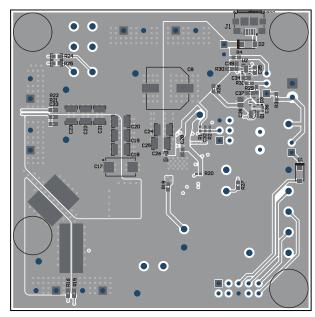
TPS546B24AEVM-1PH Bottom Side Component View (Bottom View)
